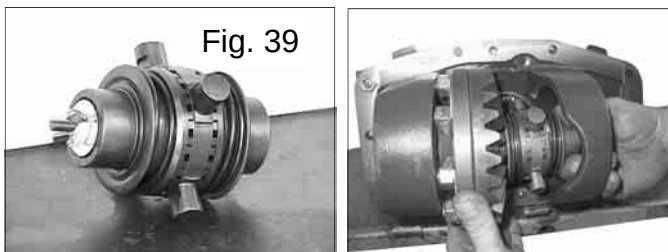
shows the differential unit inside the ring gear before its housing is assembled.
